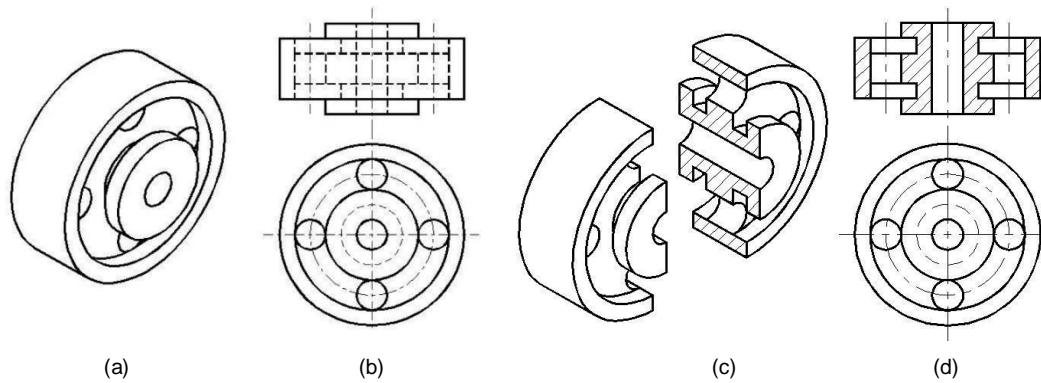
Sectional views: (a) intricate part; (b) part representation using conventional orthographic drawing; (c) cut plane; (d) sectional view showing interior details [40].
